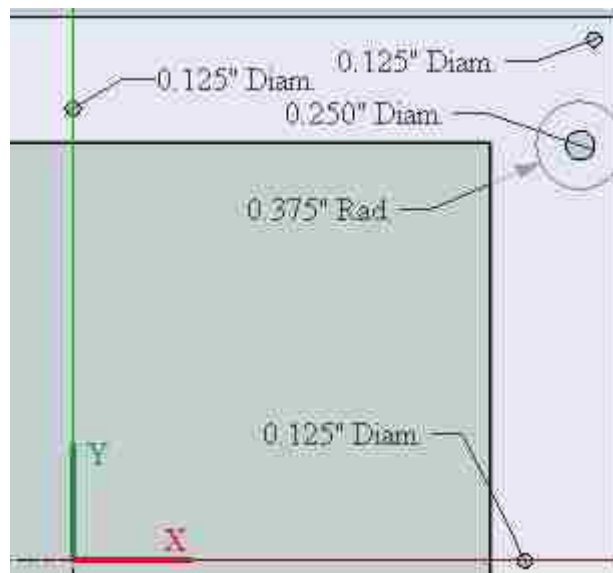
Top view of the 20x20 cm² middle trimmer aluminum plate illustrating hole dimensions.
